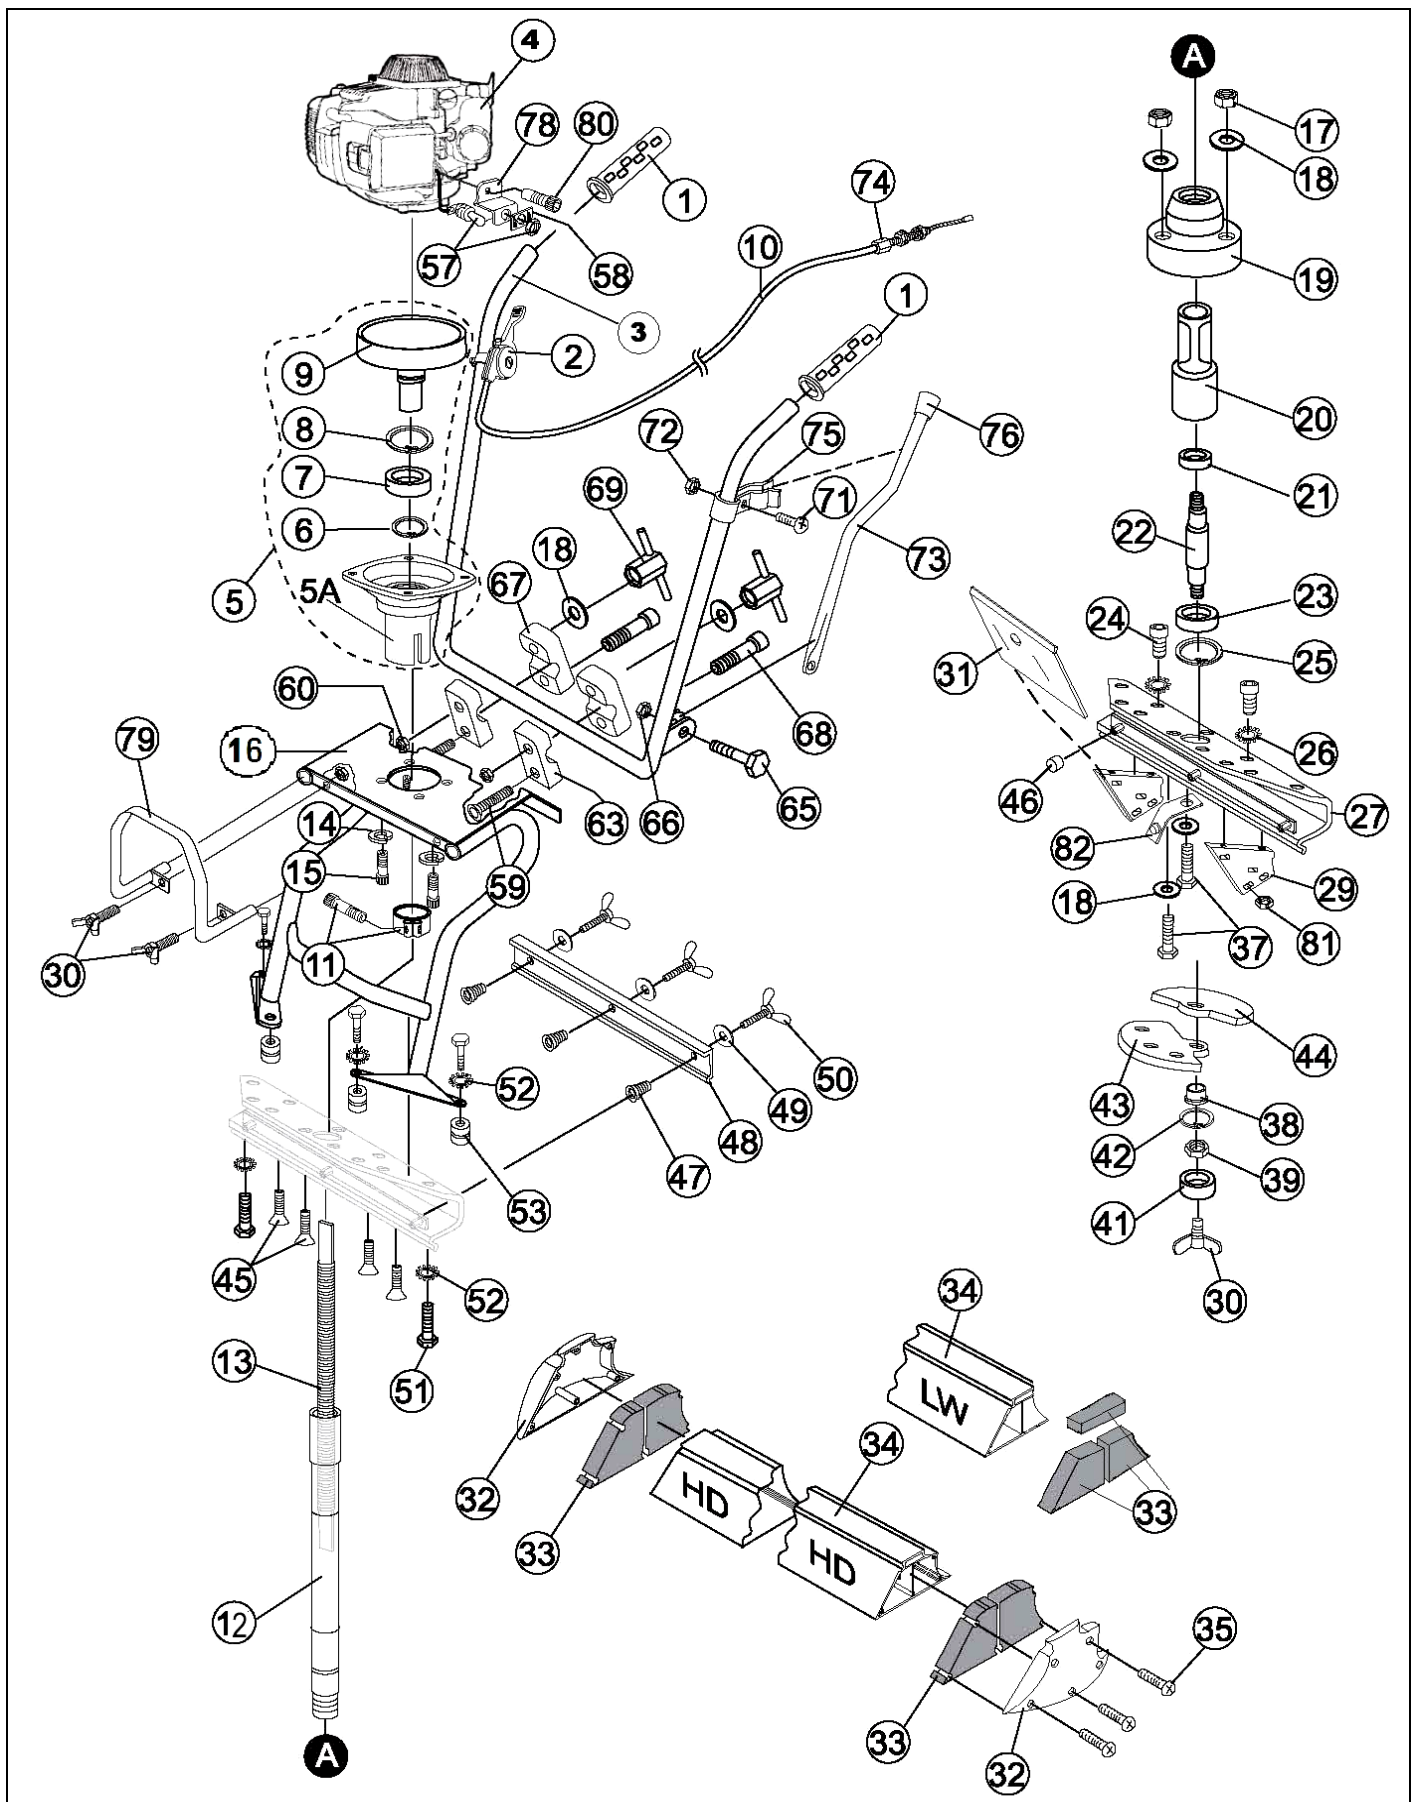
Exploded view of DuoScreed with Honda petrol engine
